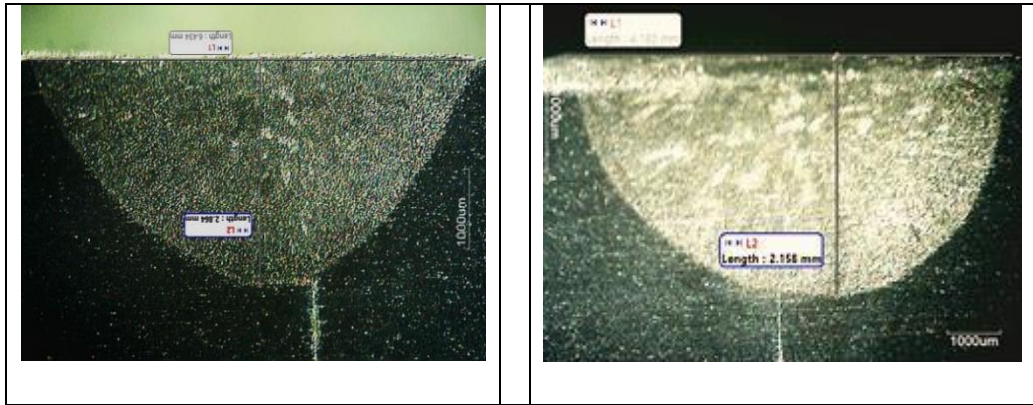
View of weld bead of Serial No. 24 (a) 1st pass and (b) 2nd Pass done on two sides
